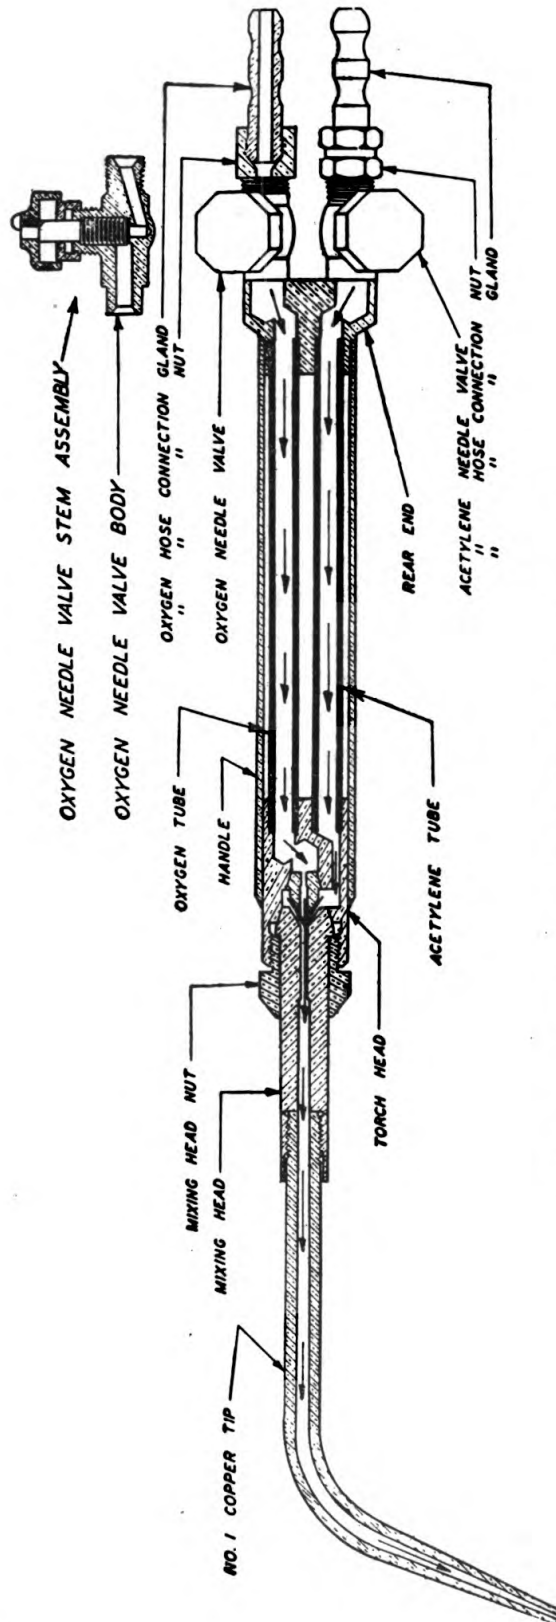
Equal pressure type general purpose welding torch.
